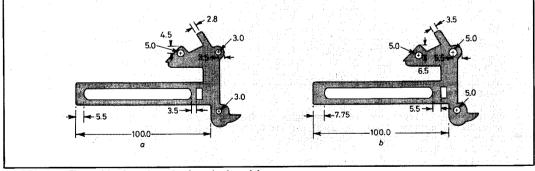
Blank profile resulting from the technology check module COMPUTING & CONTROL ENGINEERING JOURNAL JULY 1992
